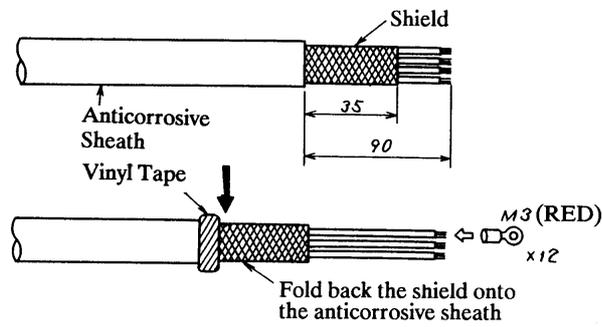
Fabricating cable connected to terminal board TB-D1 in Raise/Lower Control Box
